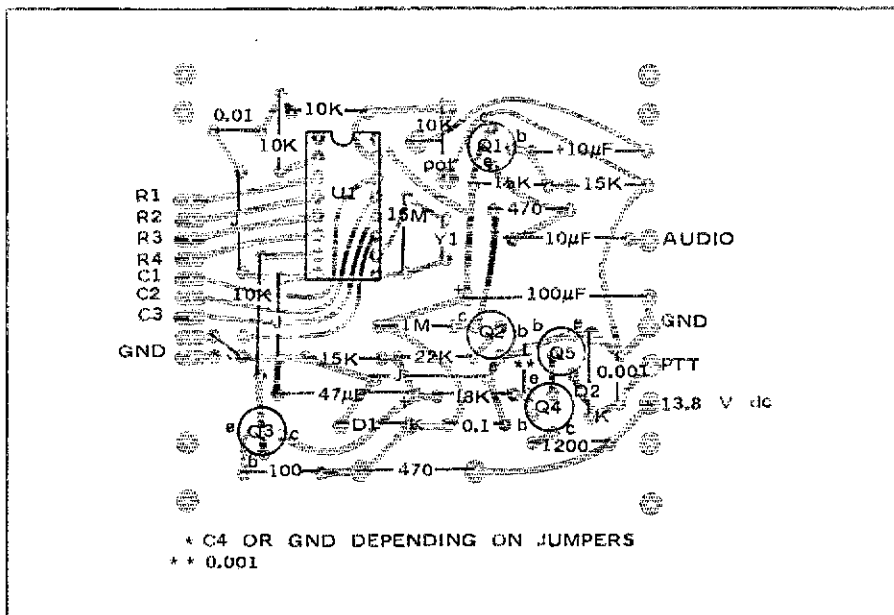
If the circuit board is used, this parts overlay will guide you when installing components. A scale-sized template for the circuit board appears in the "Hints and Kinks" section of this issue. Circuit boards are available from Lea Engineering, 1230 E. Loyola Dr., Tempe, AZ 85282, for \$5.50 each.
